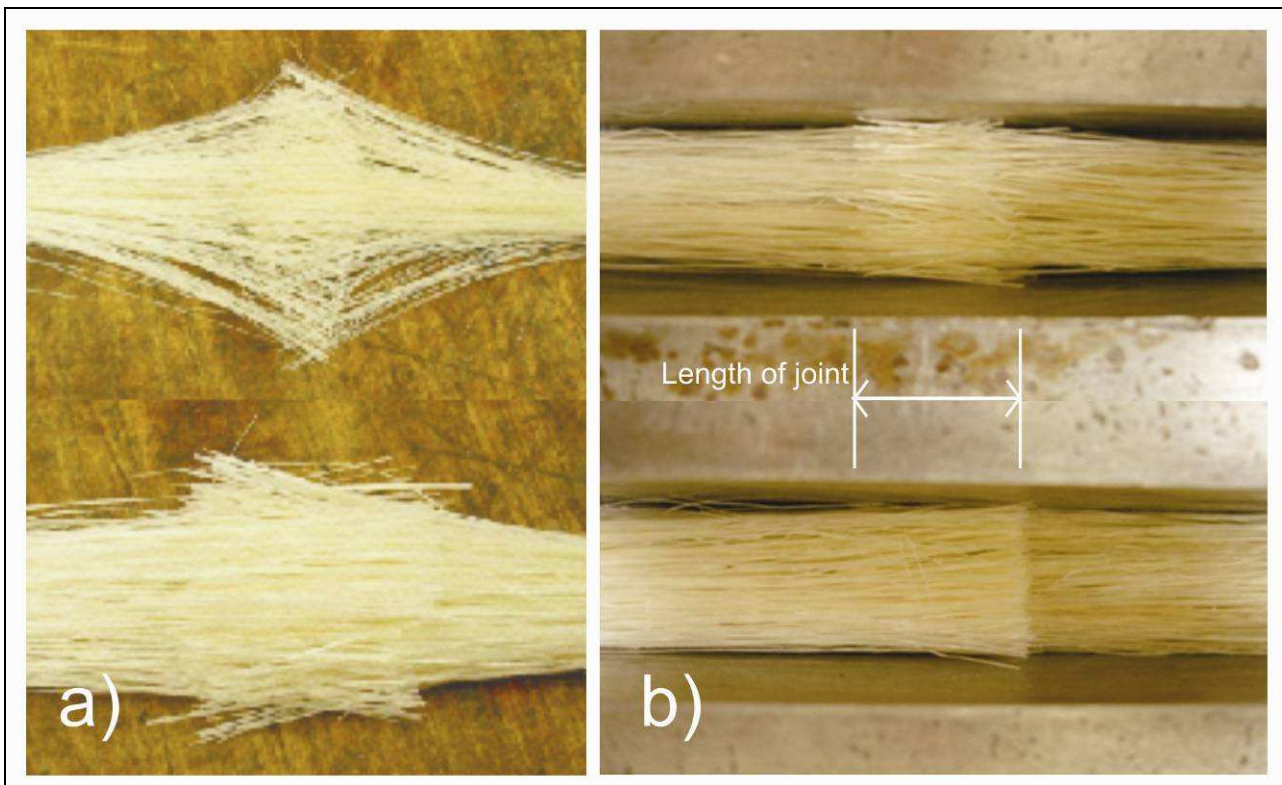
a) IFJ joint preparation, b) IFJ and LFJ joint manufacturing process within mould.
